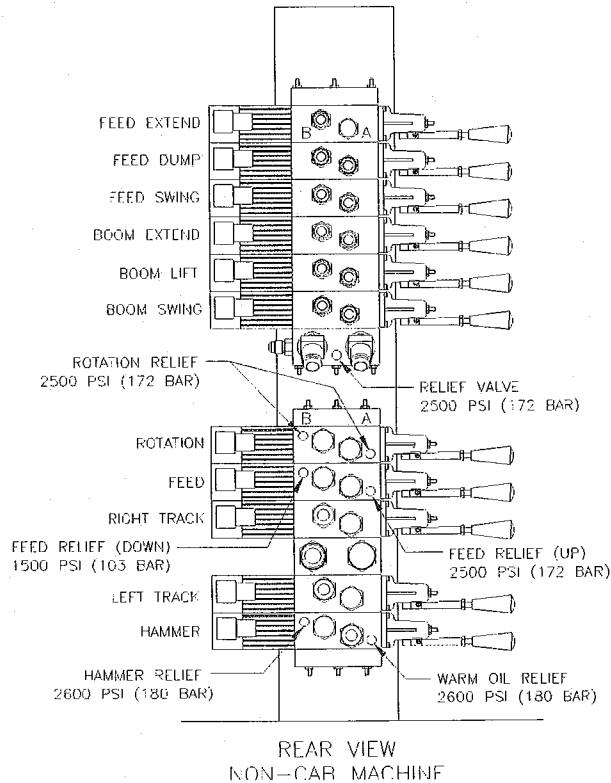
Auxiliary Valve Bank on Non-Cab Machine (ref. 414445)
